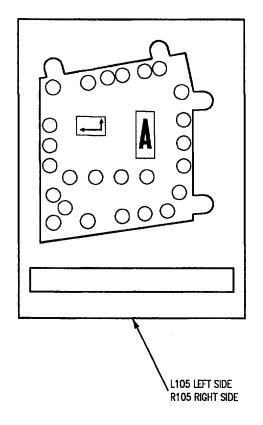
Installation of Plate Set for Drilling Door 82 (Sheet 3)
